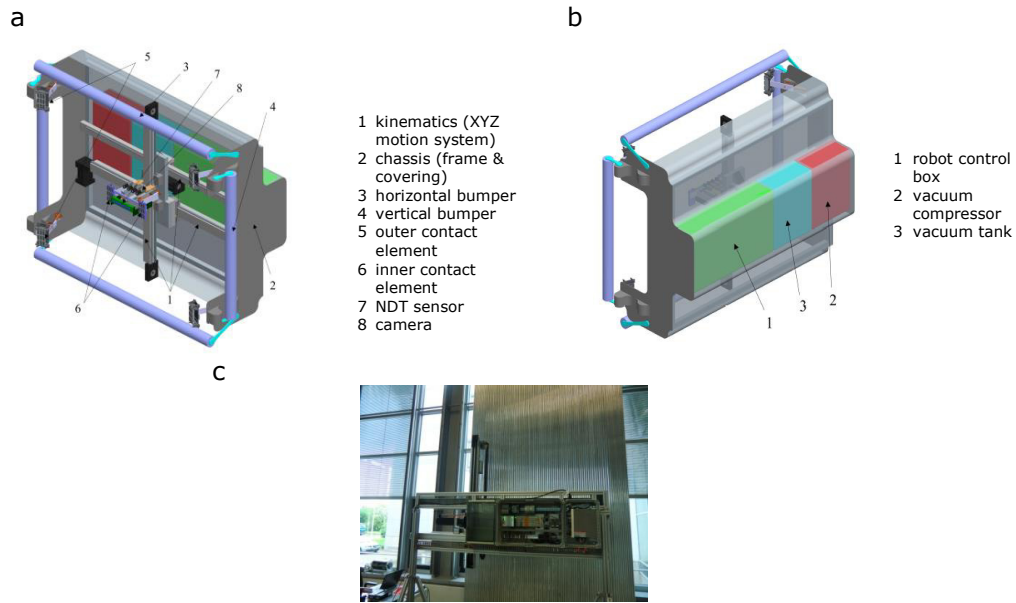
Climbing robot; (a) front view, (b) back view, (c) prototype in a mockup
